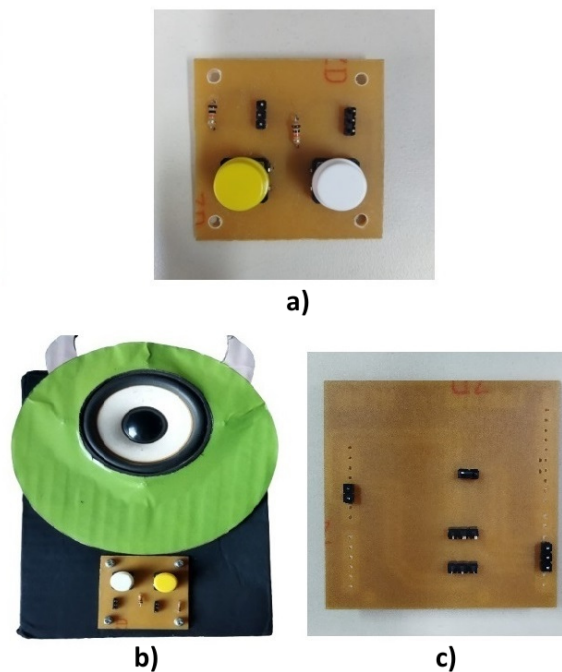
a) Components soldered on the PCB, b) PCB in the speaker enclosure, and c) EcoMusic Shield.
